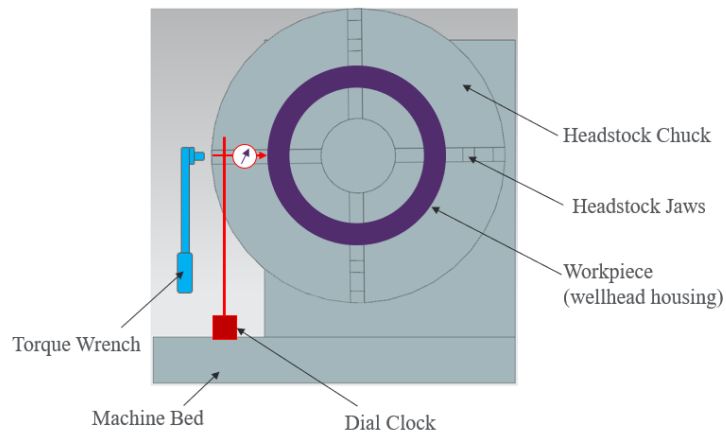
Diagram of the improved location of torque wrench and dial clock during the tightening of the torque and part alignment
